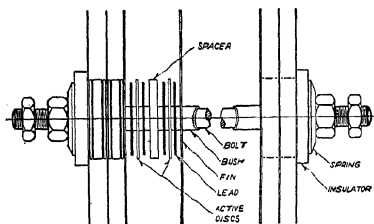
EXPLODED VIEW OF COPPER-OXIDE RECTIFIER, COMPRESSION CONTACT TYPE (Westinghouse Brake & Signal Co., Ltd.)
